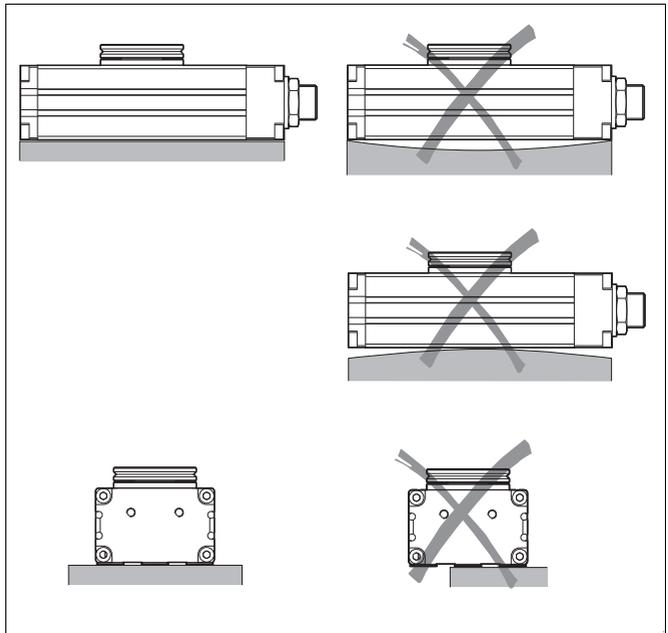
Requirements for placing the RCM rotary compact module on the mounting surface
